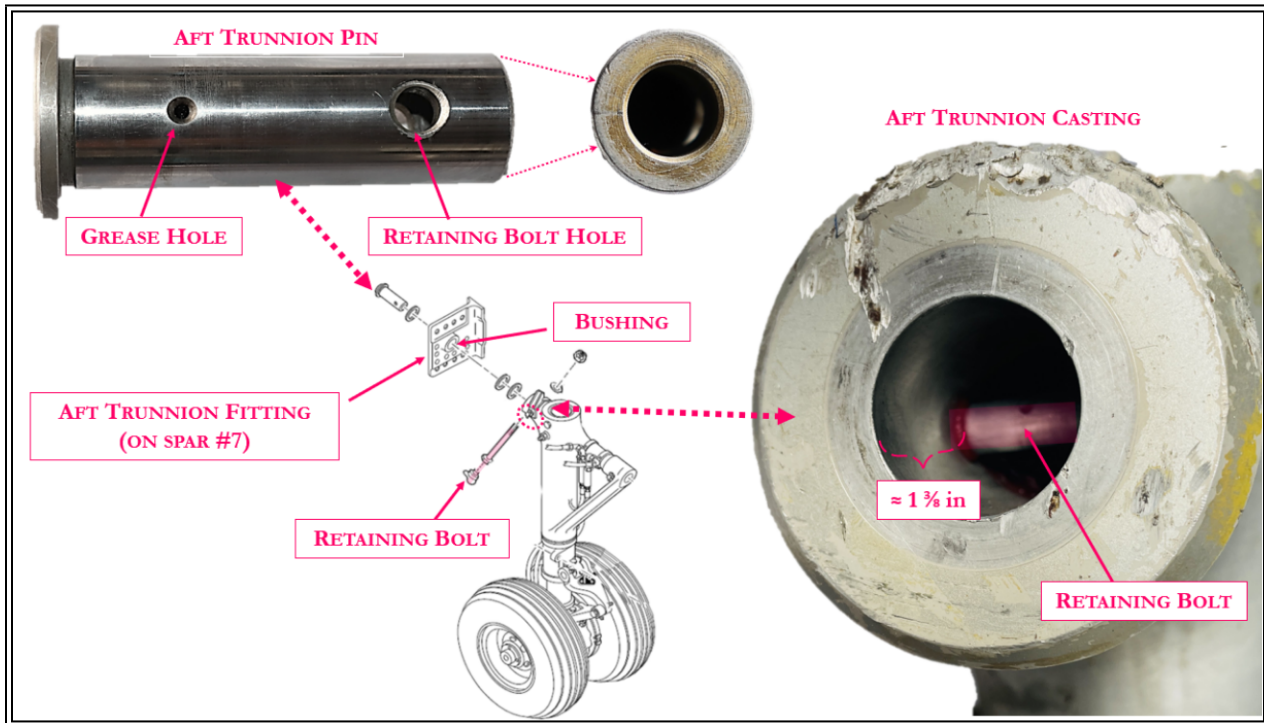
Left main landing gear aft trunnion pin showing bolt installed.
